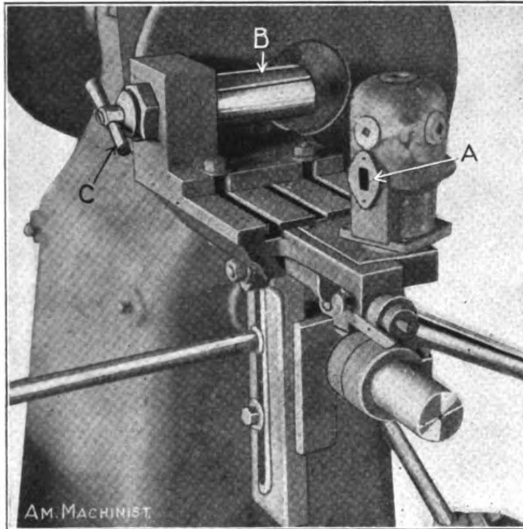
SPECIAL DISK-GRINDING FIXTURE
